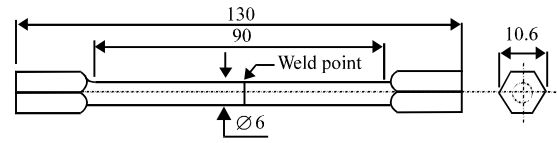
Shape and dimensions of torsion strength test specimen (mm)
